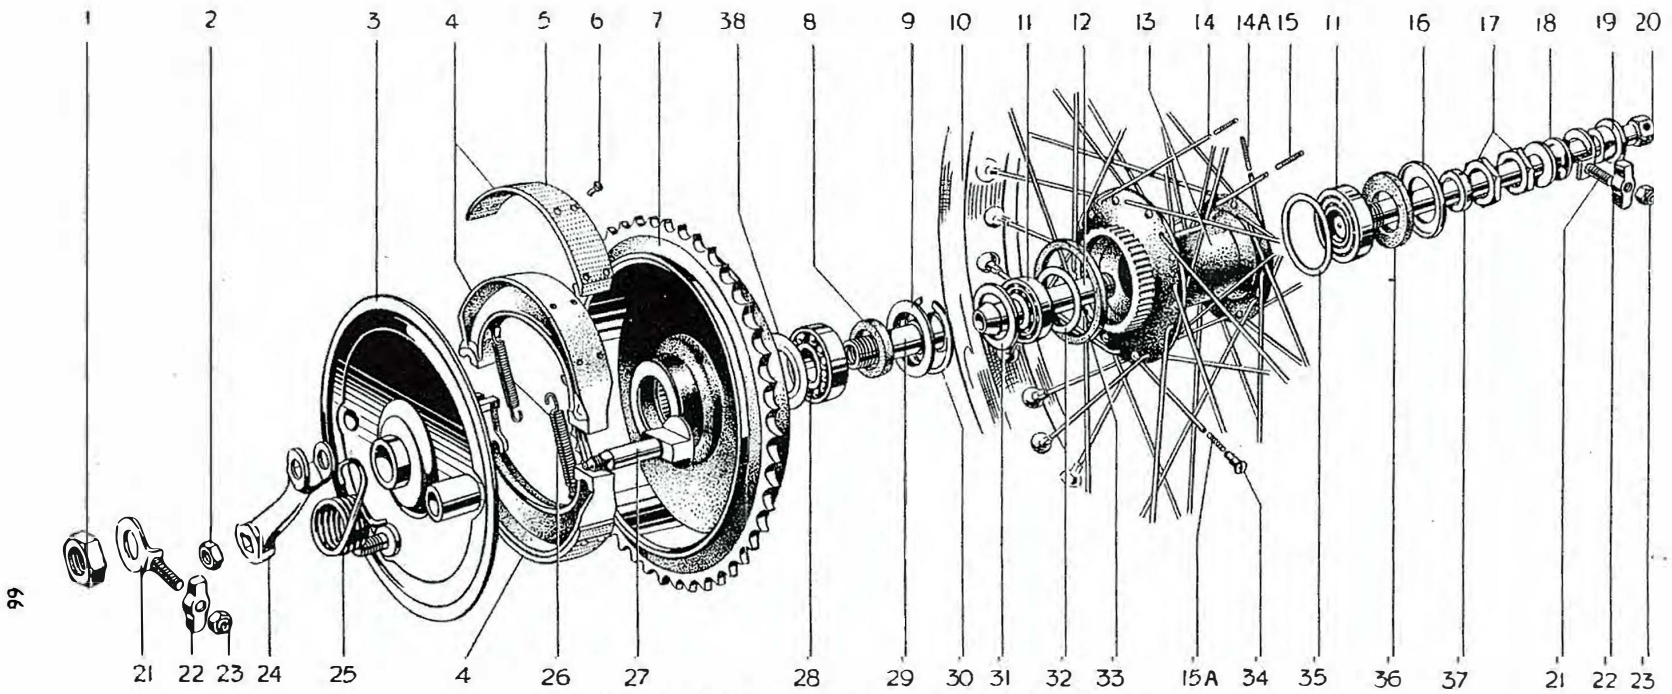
REAR WHEEL (QUICKLY DETACHABLE)
